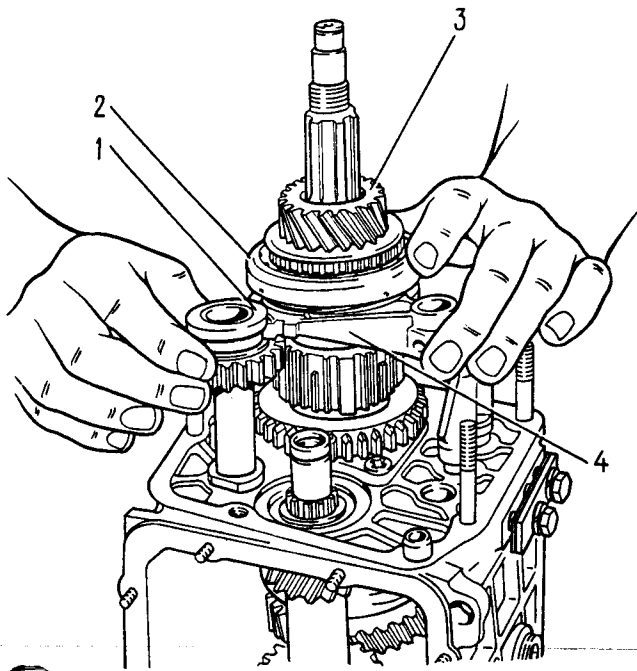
Removing Reverse Idler Gear and 5th Speed Gear Complete with Synchronizer and Fork:
